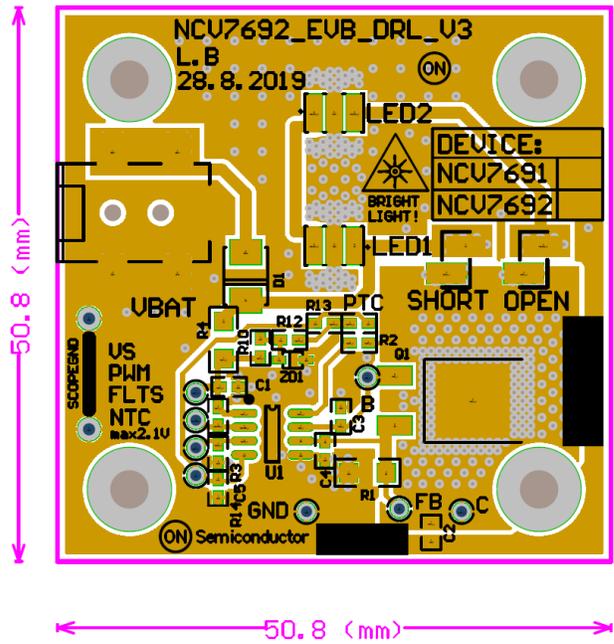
NCV7692 DRL EVB PCB Top Composite Drawing
